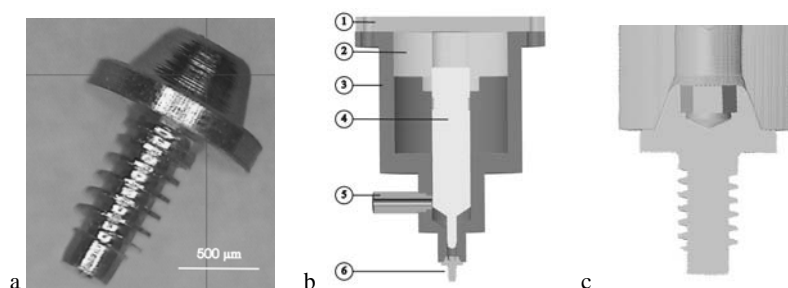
a – micro screw, b – sketch of the screwdriver, c – vacuum tube and the screw connection
